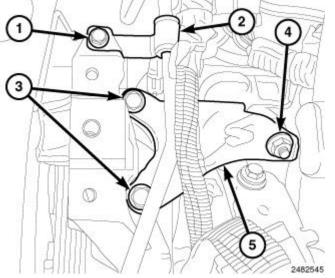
Identifying Power Steering Line Support Bracket, Bolts, & Nut Courtesy of CHRYSLER LLC
